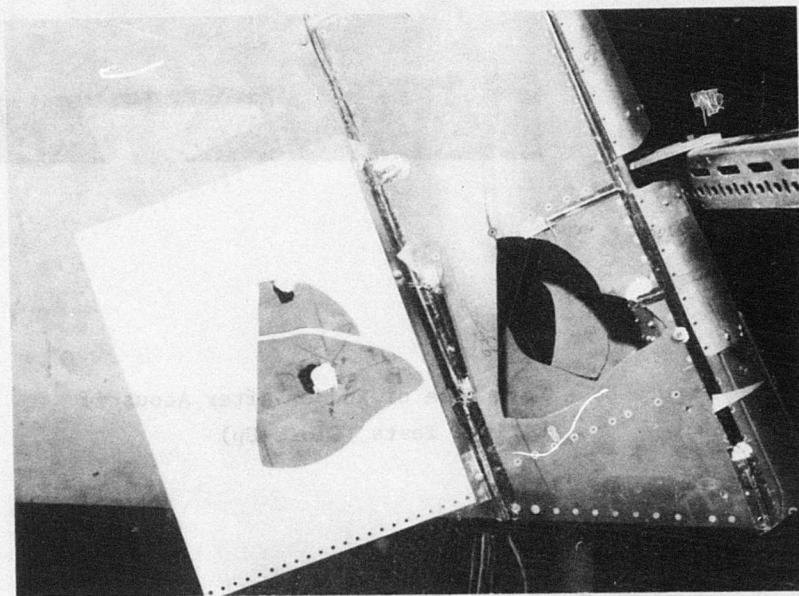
Right Side of Rudder After Acoustic Fatigue Tests Showing Damage
